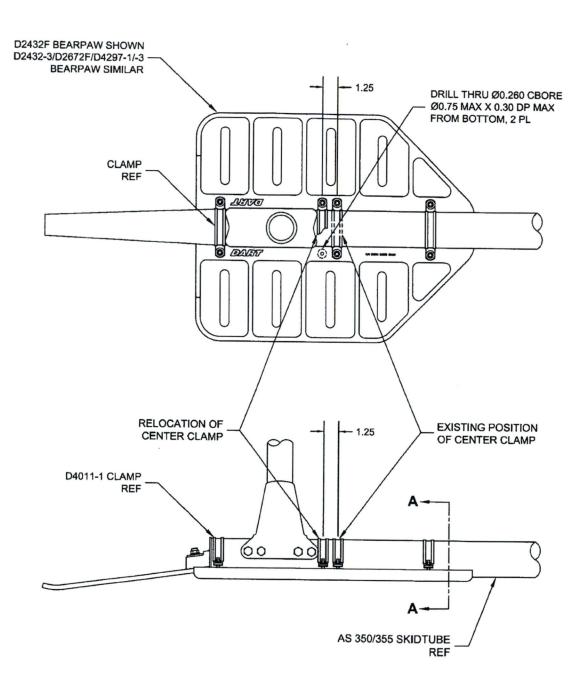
Bearpaw Installation/Modification (Center Clamp Relocation) (Side View & Top View)
